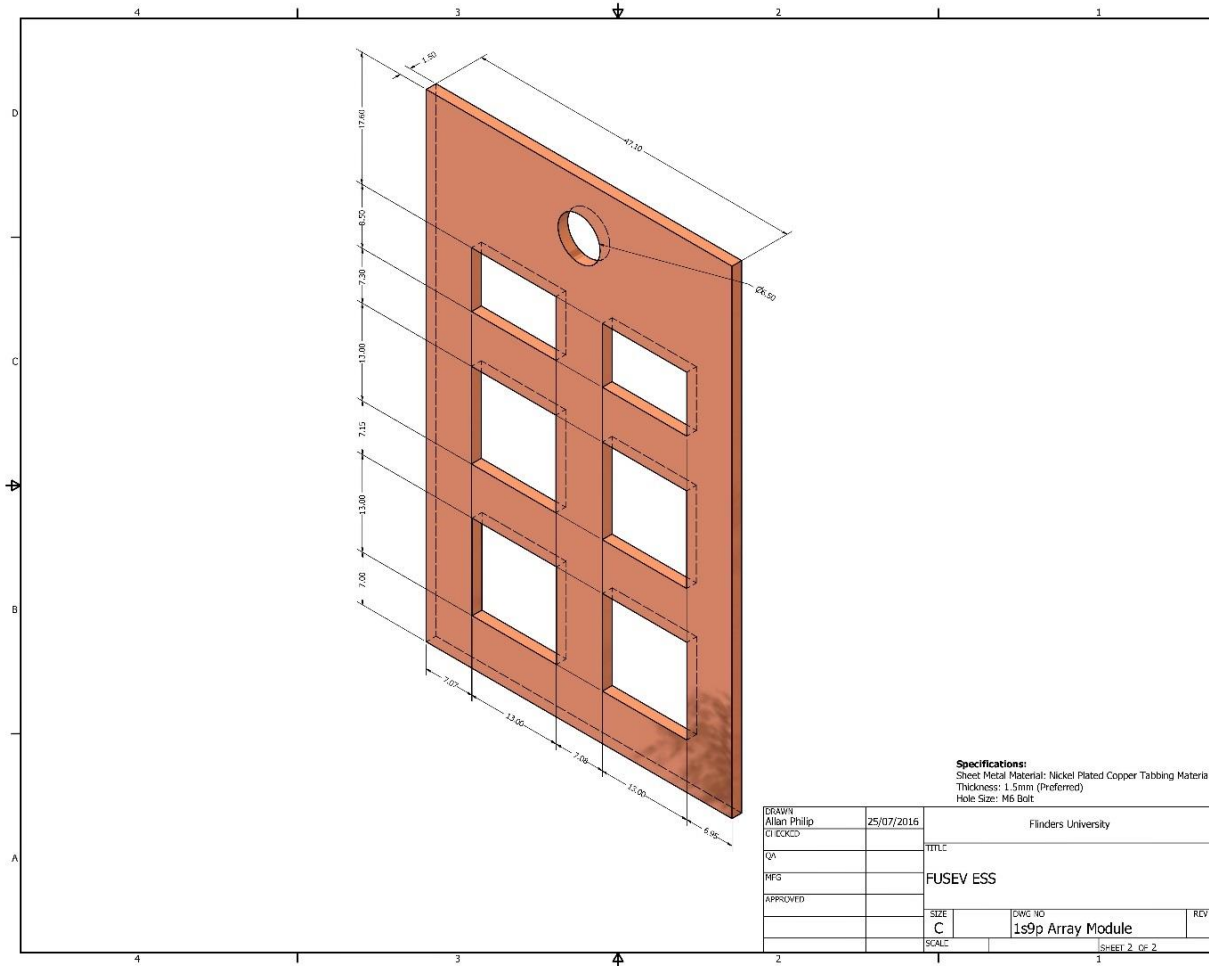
The mechanical drawing of the 1S9p module's tabbing material.
